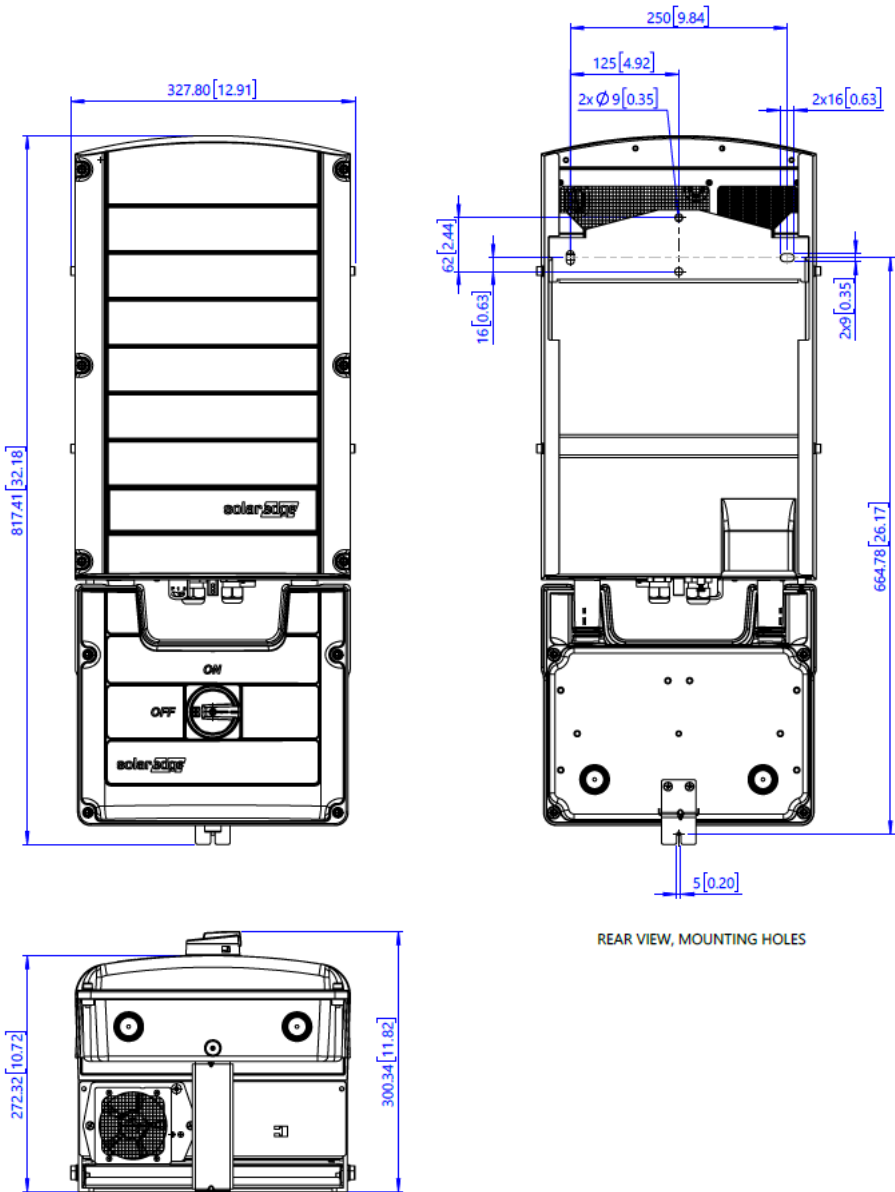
Dimensions of Three Phase Inverter with Connection Unit
